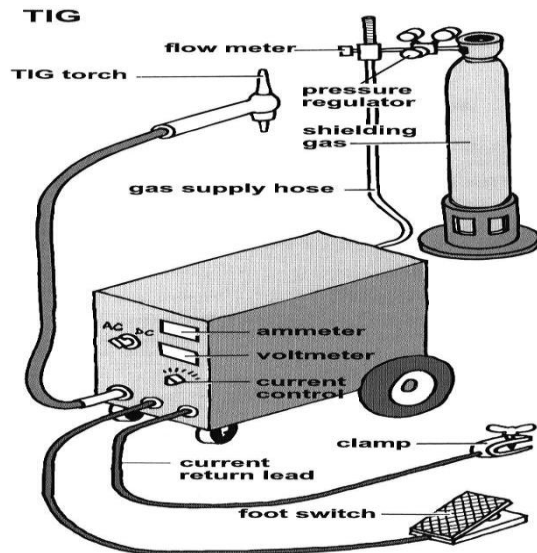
Schematic Diagram of Basic Principal of TIG Welding
